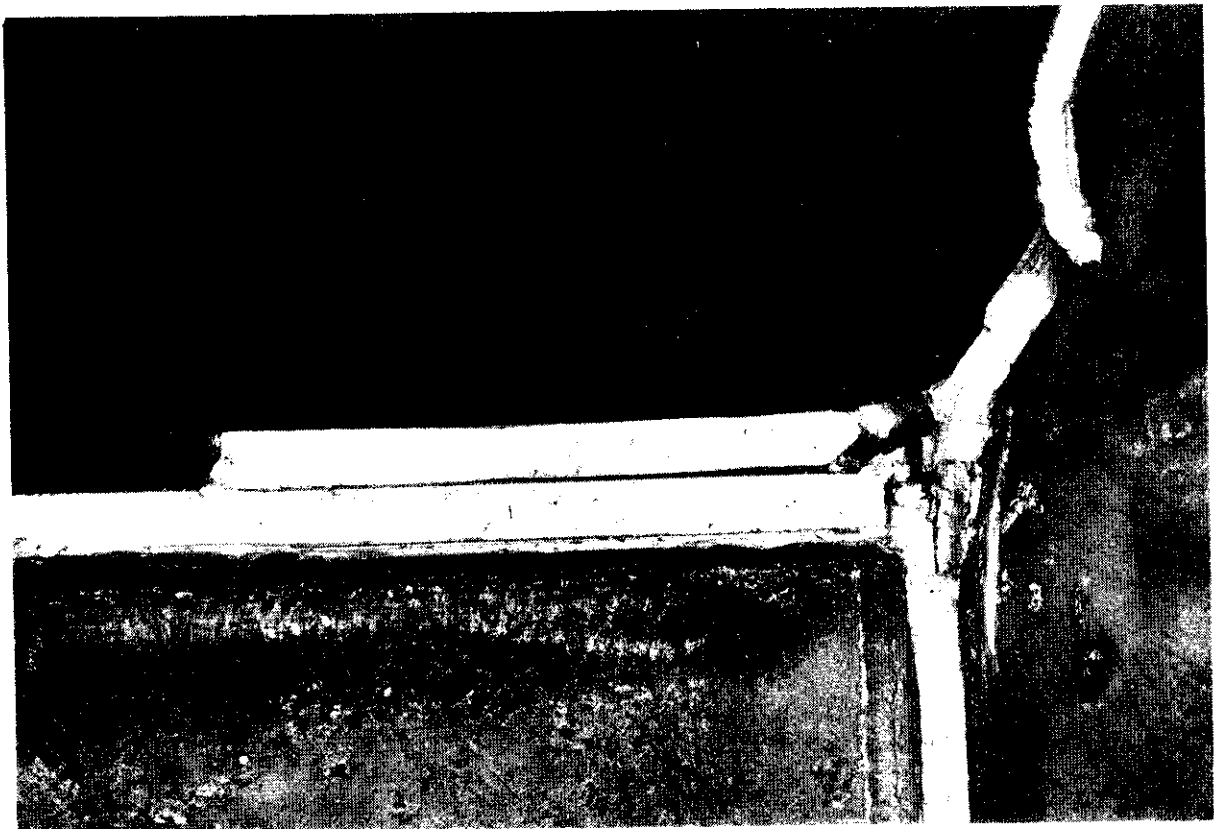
Specimen 27: Close-up of fracture patterns in deck and doubler
